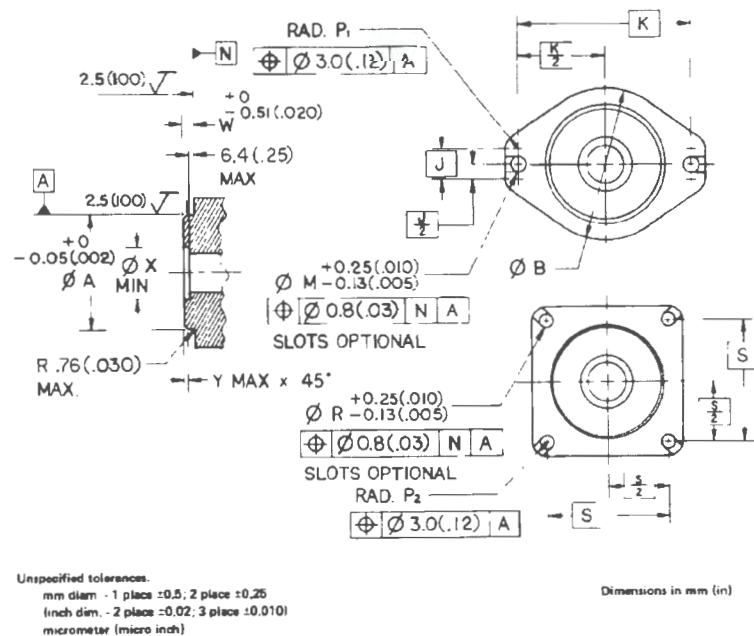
SAE Hydraulic Pump and Motor Mounting Dimensions are shown (SAE, 2013).
